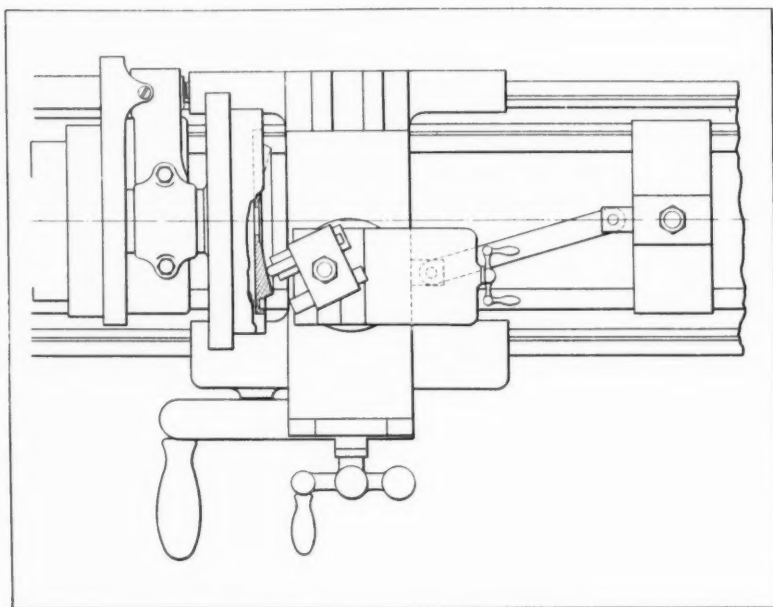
Plan View of Lathe Attachment, as Used for Concave Turning
